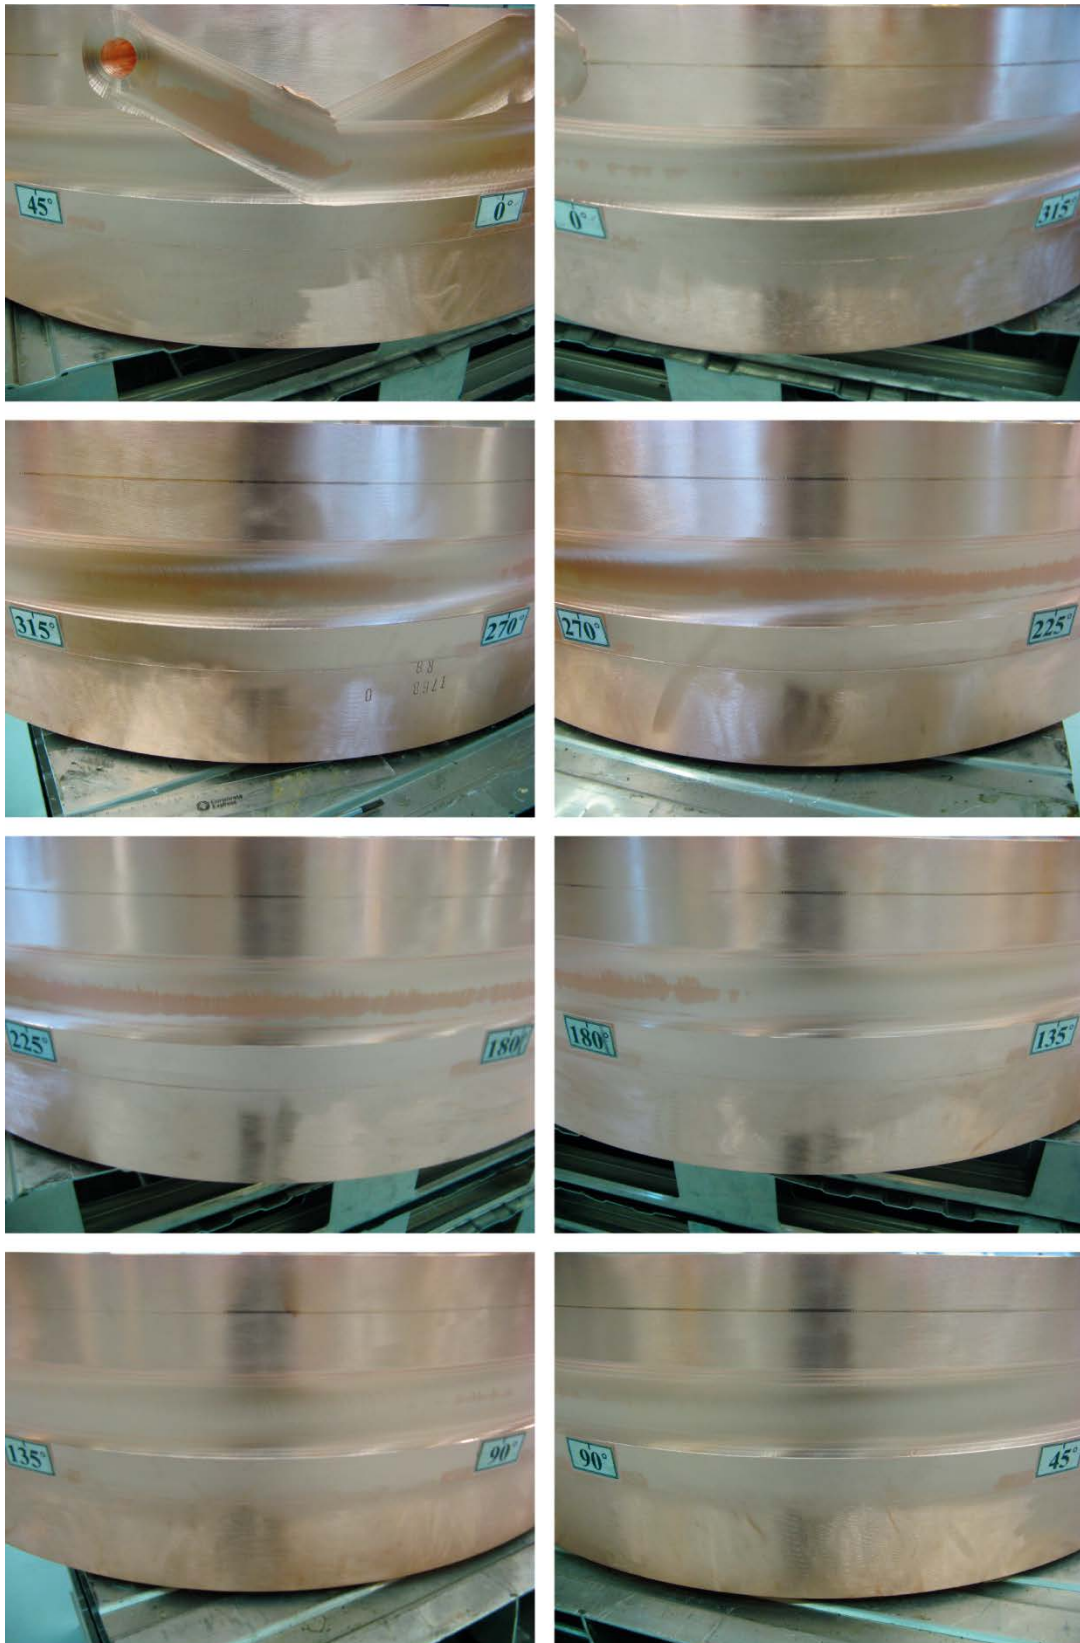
Photographs of the weld with external and internal gas shielding (FSWL109). Note the slight discolouring at some locations on the weld surface. Oxide layer thickness of the darker patches is estimated to be below 15 nm based on the model presented in Chapter 4.
